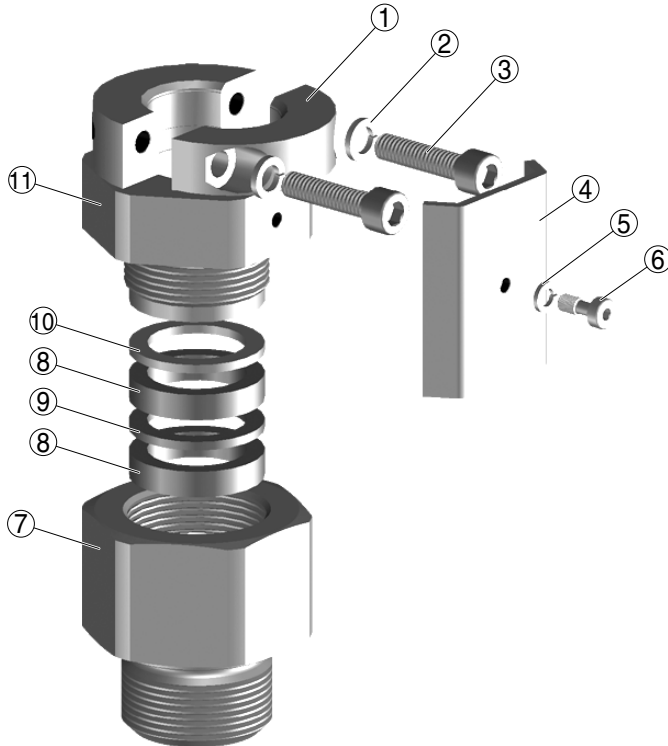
Lock fitting ARV-LS8112.2 - up to 16 bar (232 psig)
